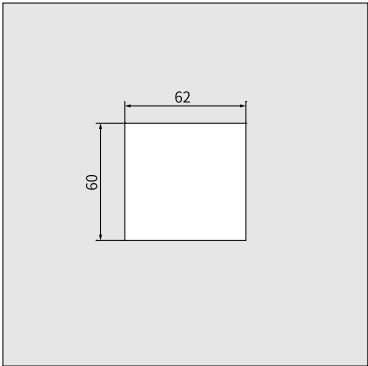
Dimensions (unit: mm) of the cabinet door opening for mounting the MD-BP-M through the snap-fit joint
